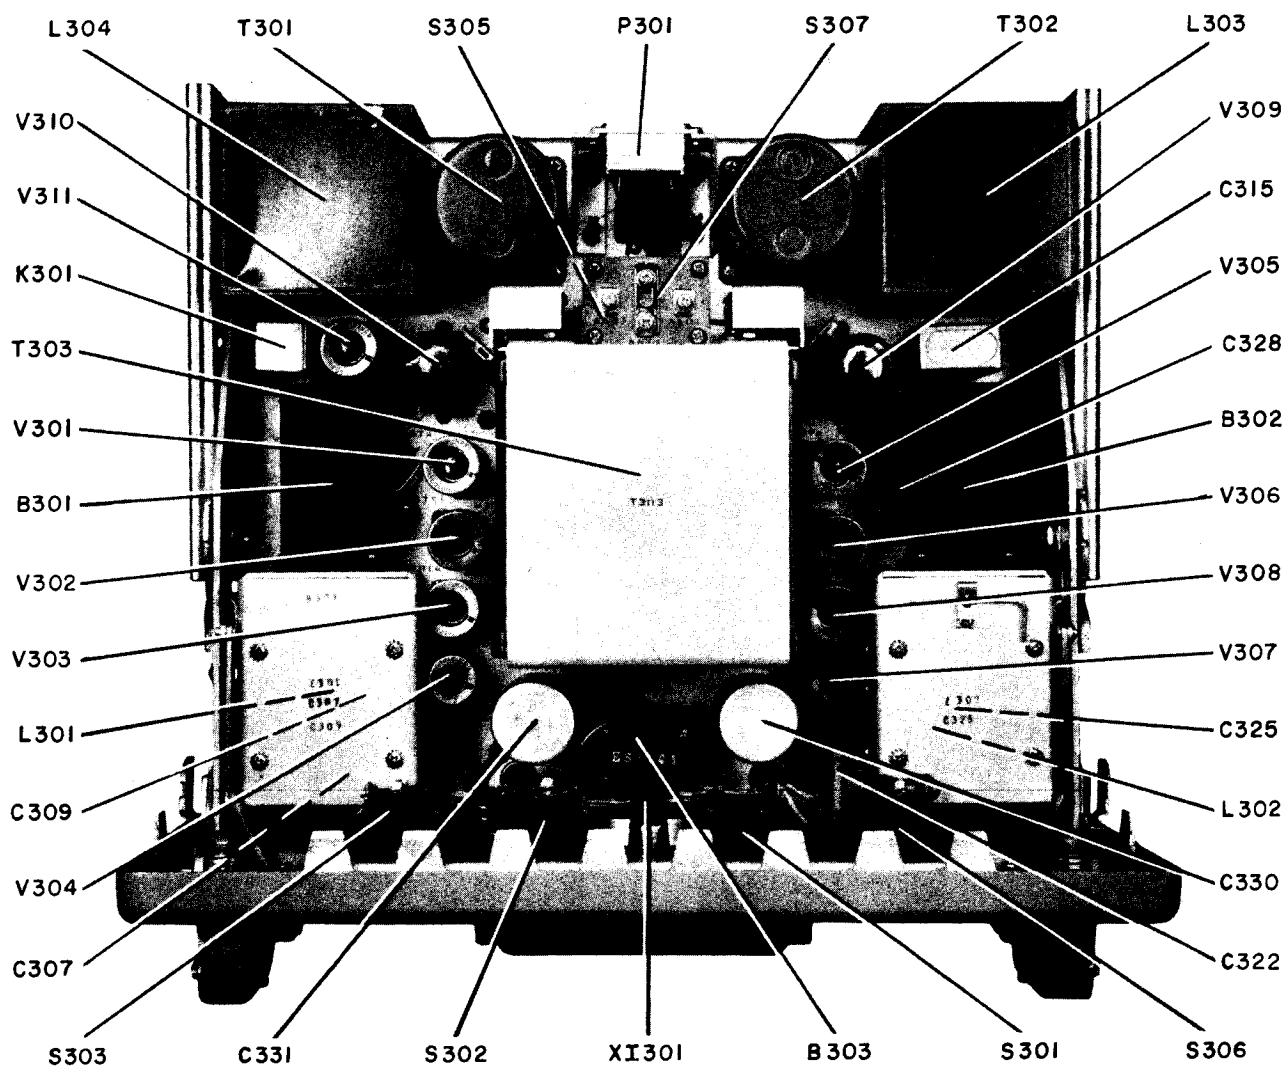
Component Locations, Top of Chassis, Lower Unit
